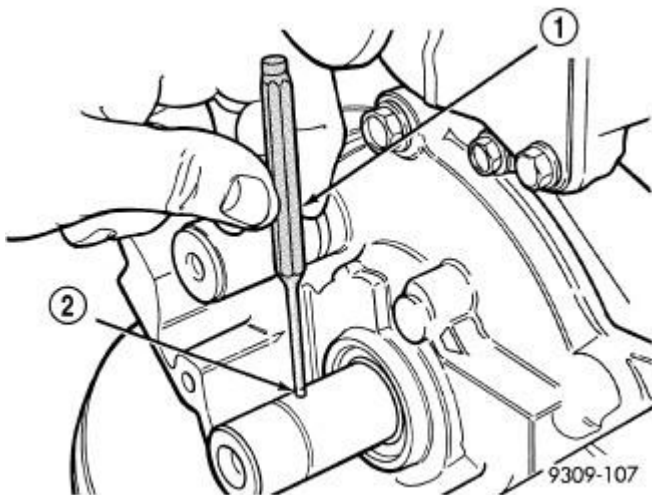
Crankshaft Sprocket Dowel Pin-Removal/Installation
